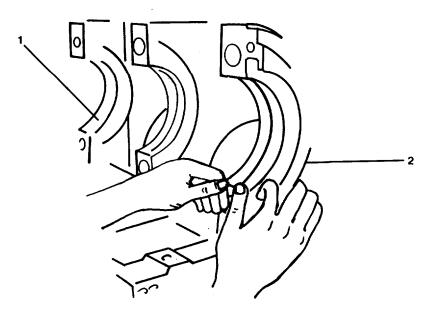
Main Bearing Shell (Sleeve) Installation.
